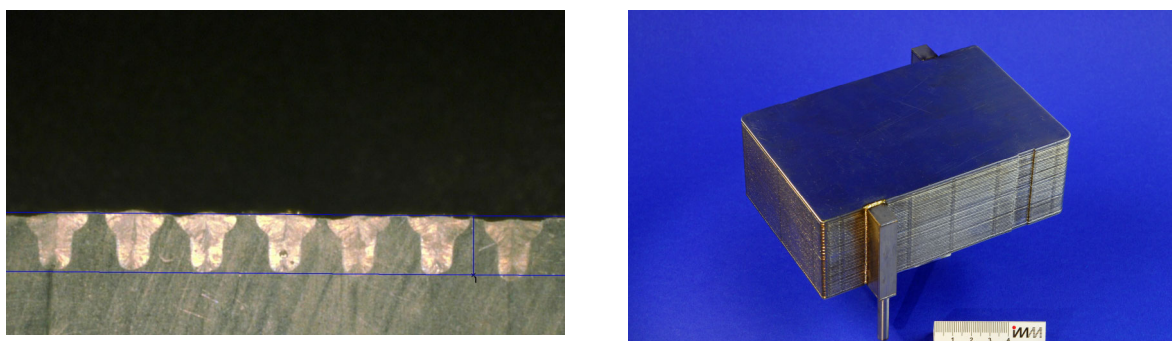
Welding seams of 1 mm thickness achieved at high temperature stainless steel 1.4841 (AISI 314)(left); plate stack joined by laser welding (right).
